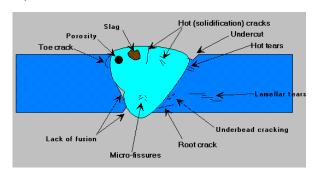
Types of defects on weldments (Fontana, F.G., 1987)
